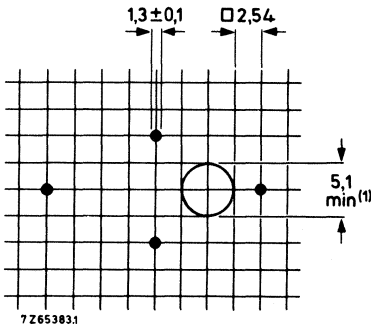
Hole pattern for mounting on a printed-wiring board.
